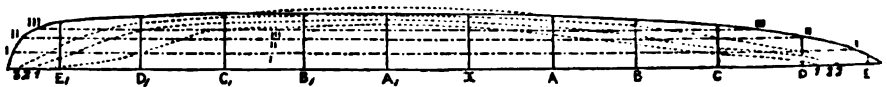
Great Eastern*—Half-breadth Plan.
